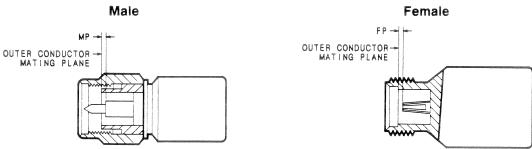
3.5 mm Short Circuit and Fixed Load Terminations
